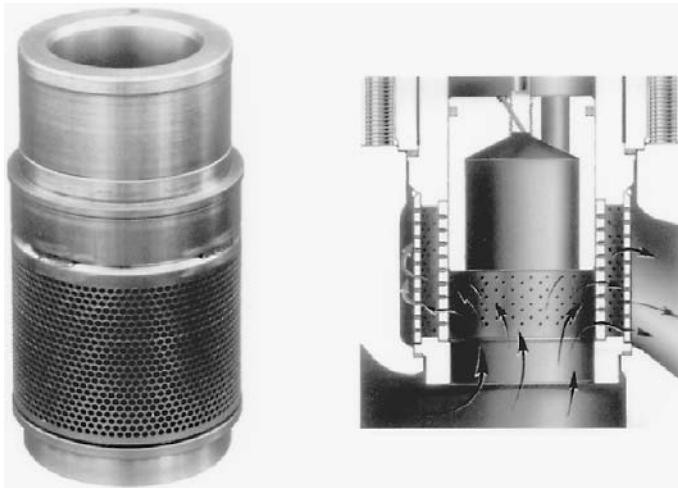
Globe valve equipped with two-stage attenuation cage. (Courtesy of Fisher Controls International, Inc.)
